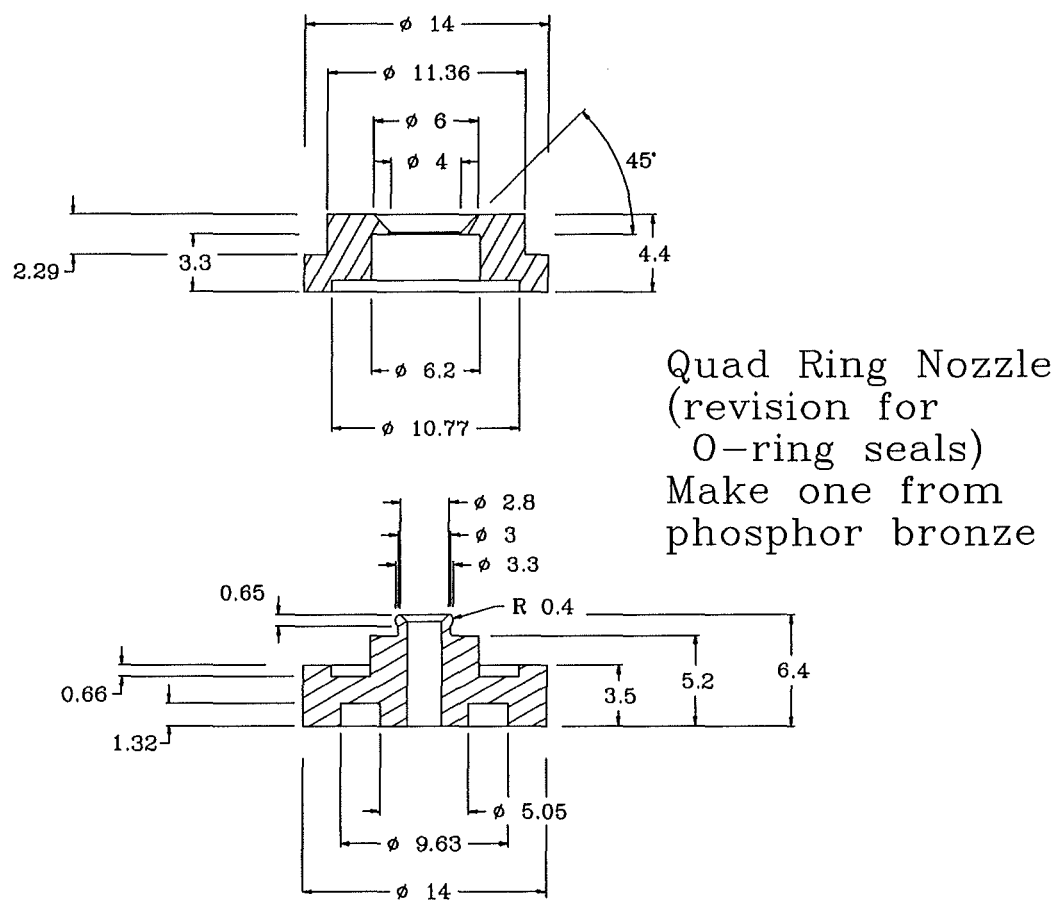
Quad-ring nozzle modified for O-ring installation seals
